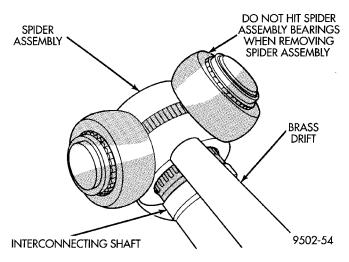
Spider Assembly Removal from Interconnecting Shaft
